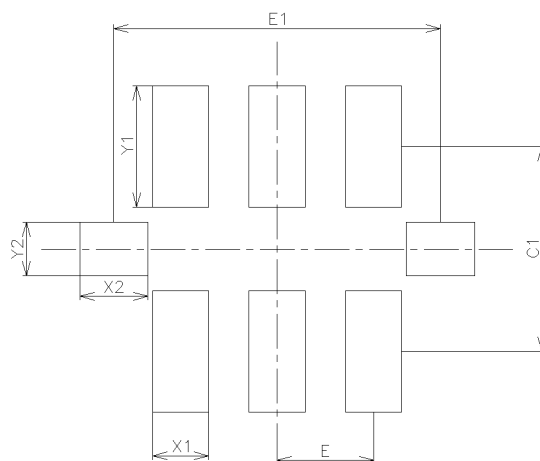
Si542 (3.2x5 mm) PCB Land Pattern
